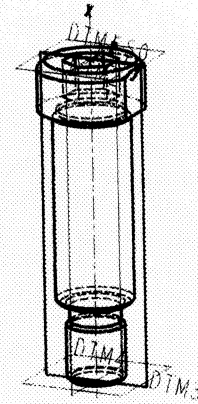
FIGURE S Exploded Assembly with Datums and Coordinate System Displayed
